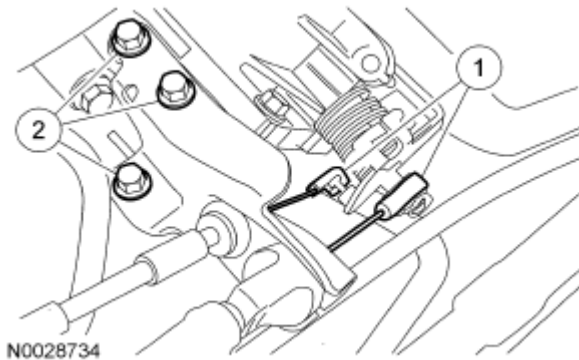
Identifying Accelerator Cable Bracket & Bolts
